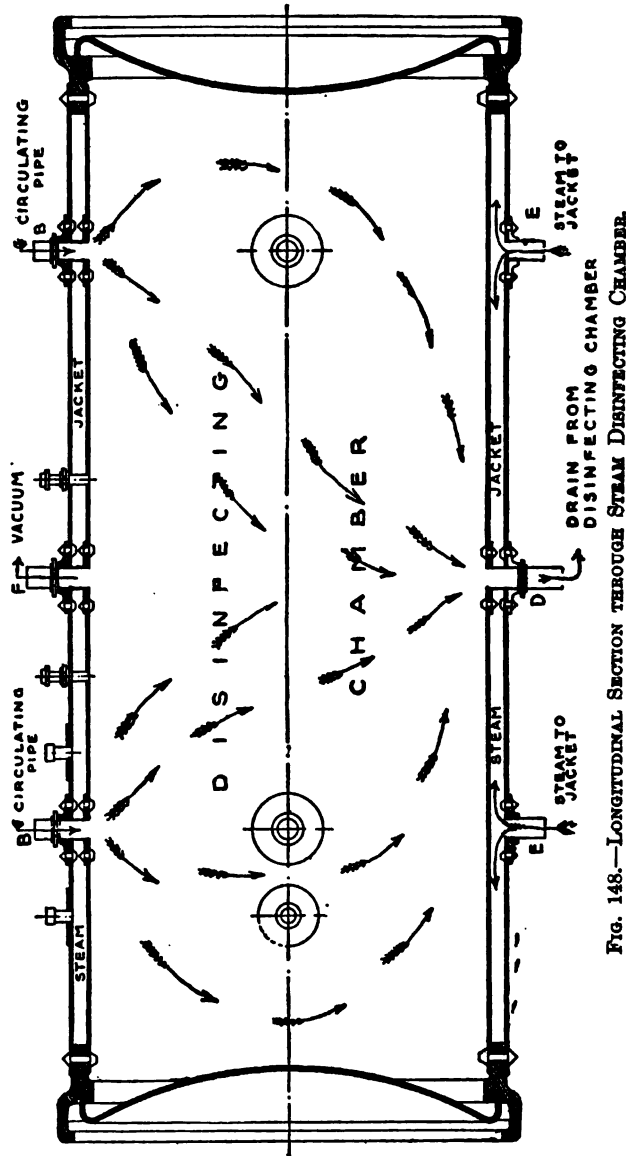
LONGITUDINAL SECTION THROUGH STEAM DISINFECTING CHAMBER.
